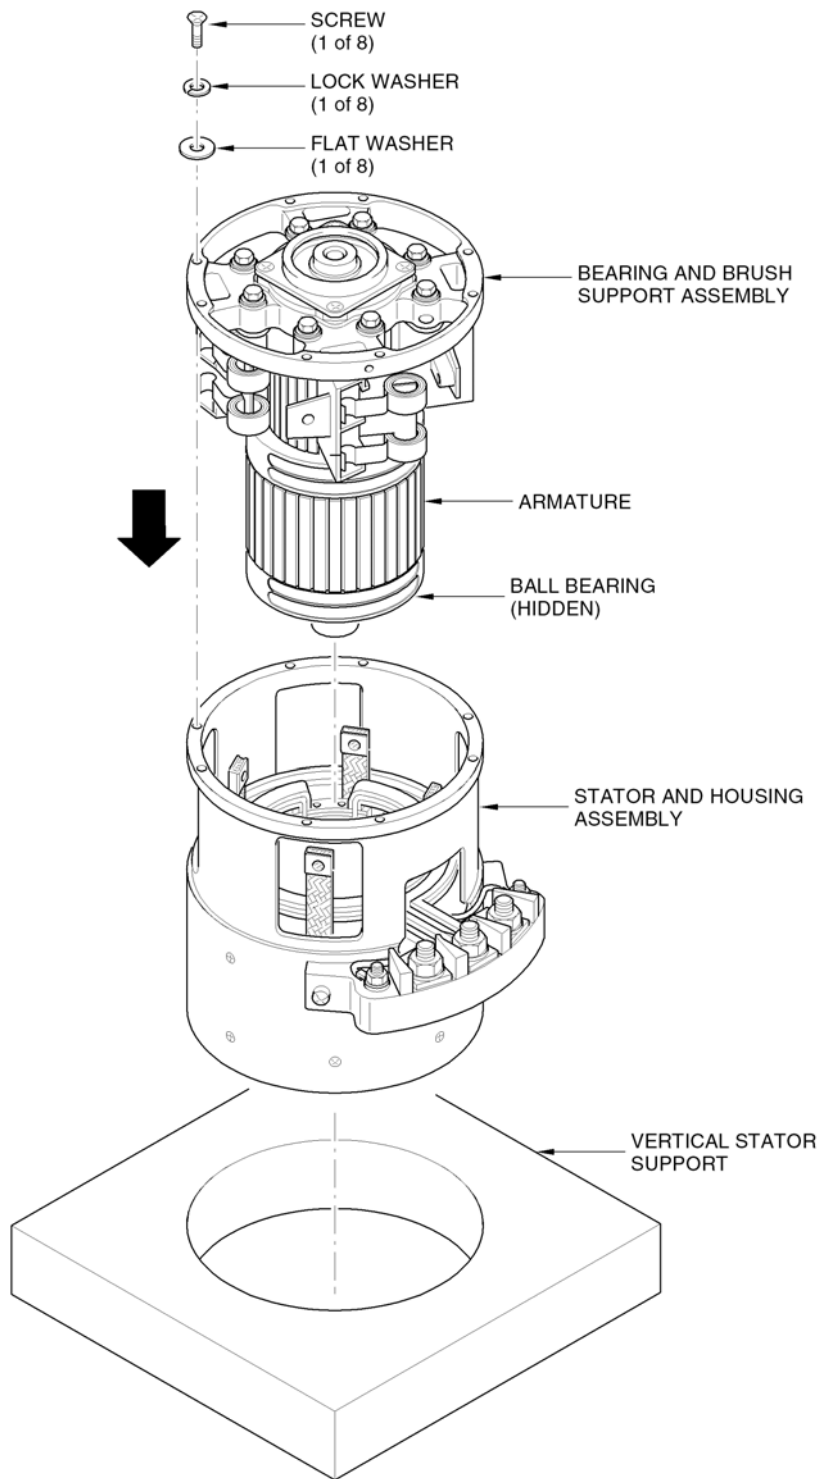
Assembling Bearing and Brush Support Assembly with Stator and Housing Assembly
